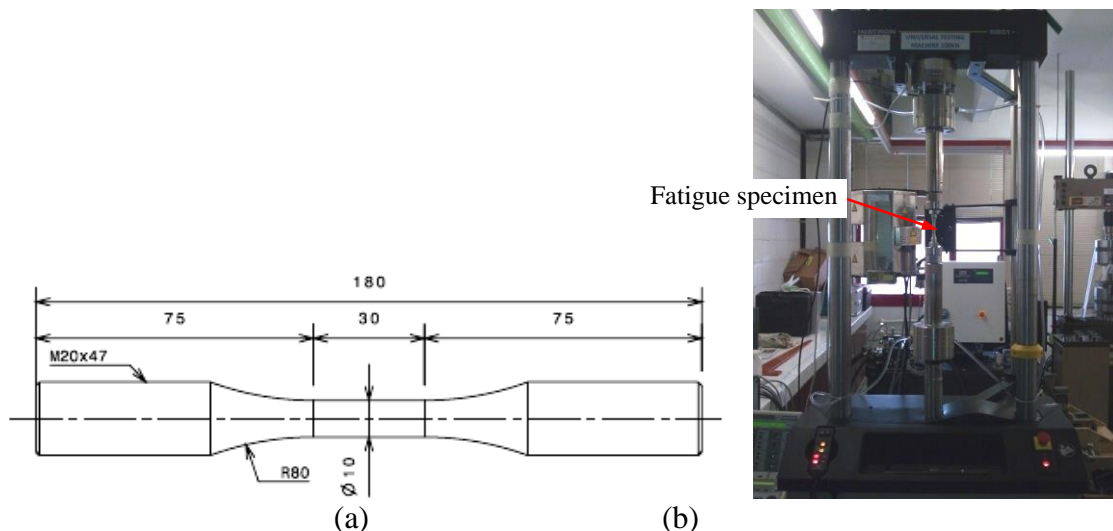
(a) Geometry dimension of the fatigue specimen (in mm); (b) Servo-hydraulic fatigue testing machine.
